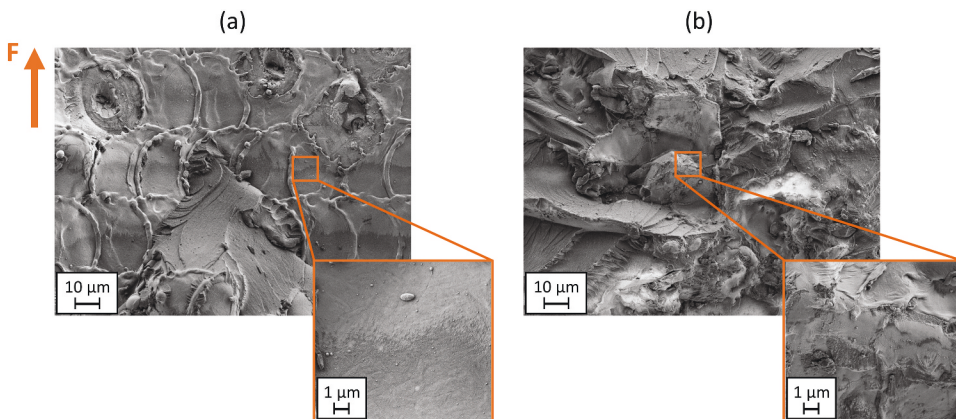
Fracture surfaces of fatigue-loaded SLJ specimens with (a) A90 laser treated and (b) A90 grit blasted+laser treated surface. The load direction F is depicted.
